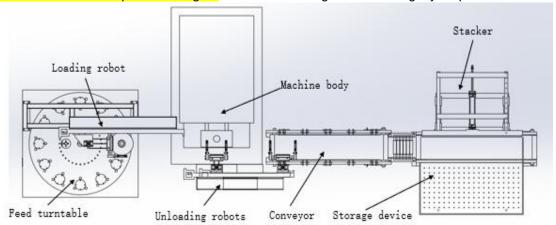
Automatic loading and unloading layout scheme plan diagram
